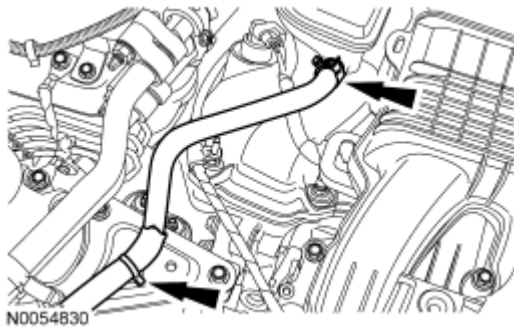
Identifying Pin-Type Retainer From Engine Mount Brace
